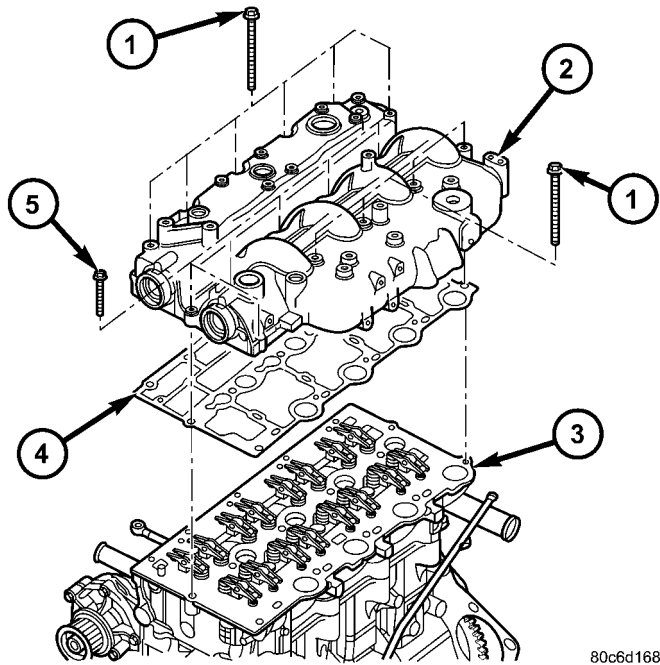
CYLINDER HEAD COVER/INTAKE MANIFOLD ASSEMBLY
